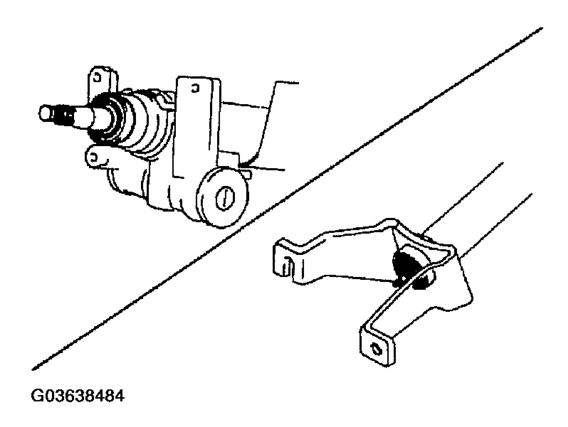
Inspecting Column Bearing Damage Courtesy of MAZDA MOTORS CORP.
